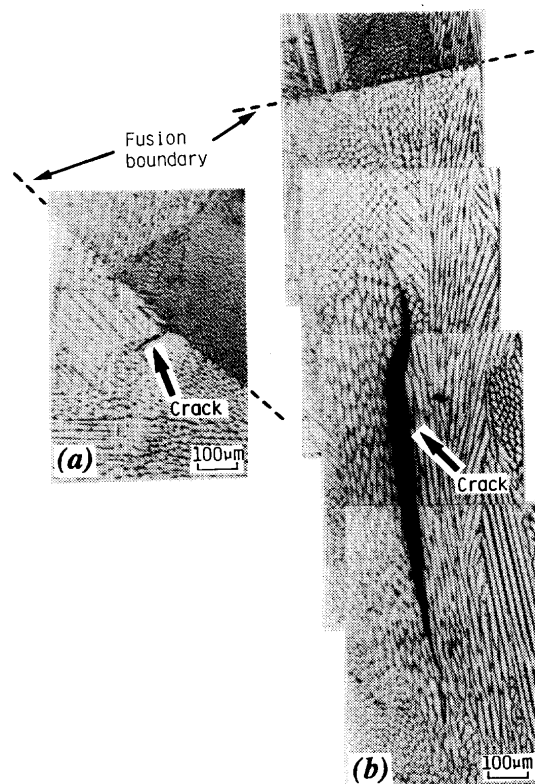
Hot cracking in the reheated weld metals obtained by the cross-bead varestraint test.
